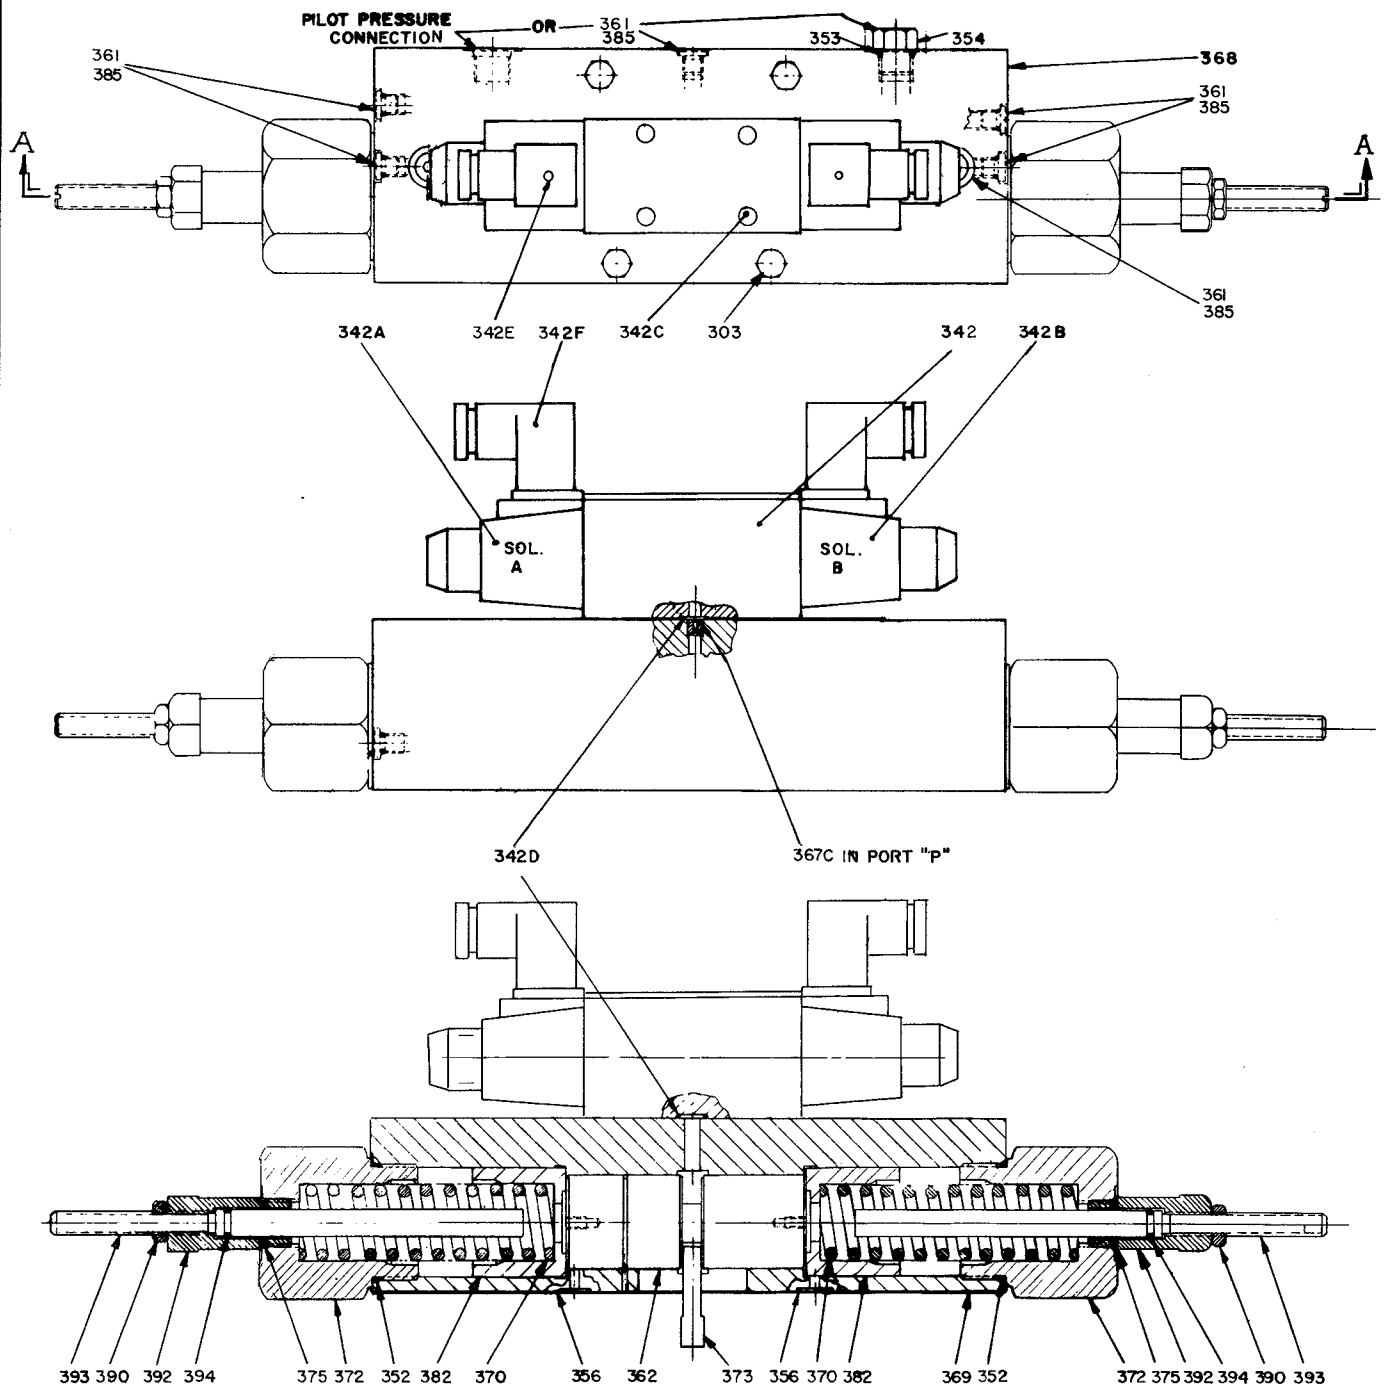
Parts Drawing, Oilgear Type "RS" and "RY" Controls (E51240 sht. 2).
